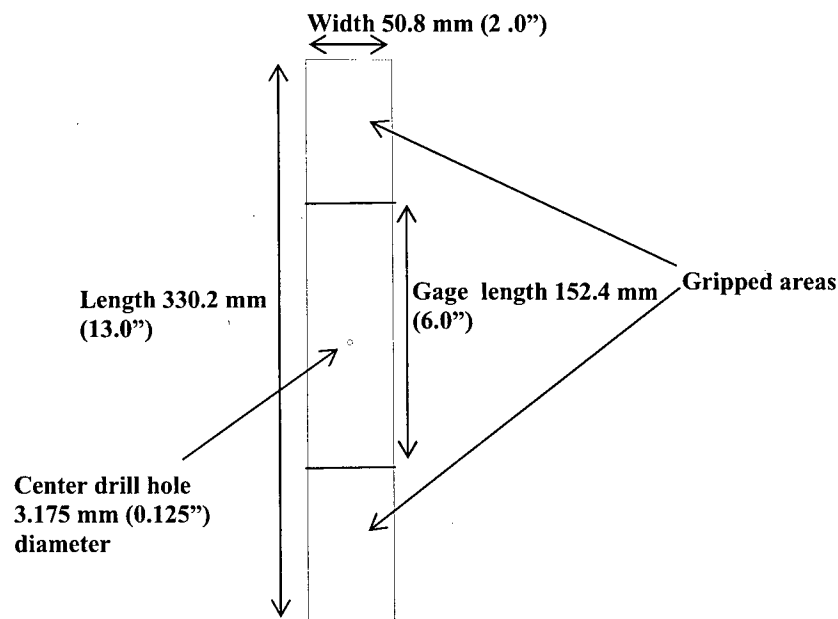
Narrow 7075-T651 specimen with drill hole/corner-crack starter notch
